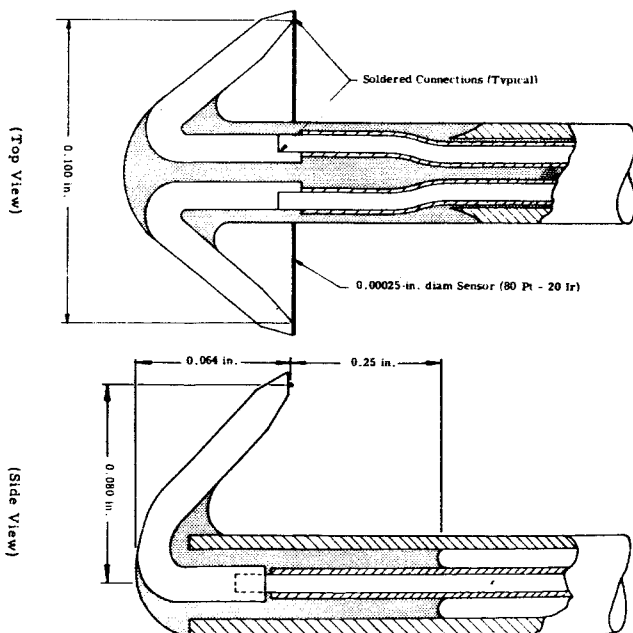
DETAIL OF BENT PROBE TIP WITH HOT-WIRE SENSOR
